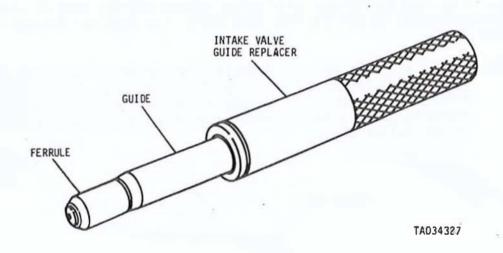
Positioning intake valve guide on valve guide replacer.
